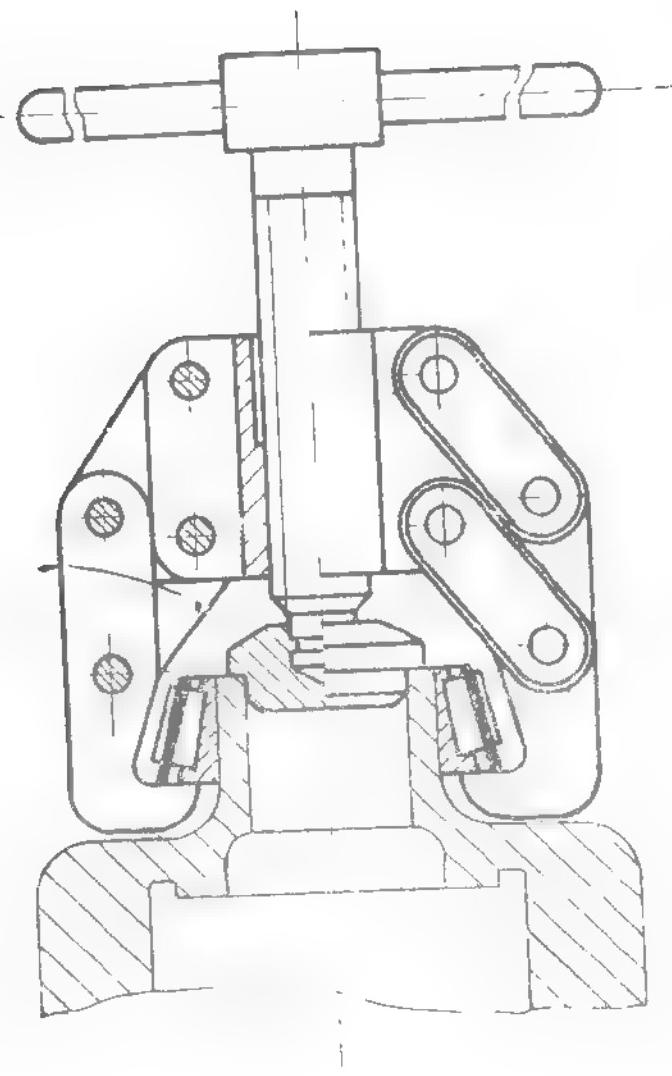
EXTRACTING DIFFERENTIAL CASE BEARING
